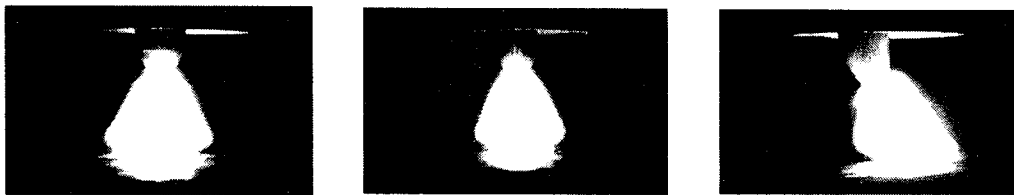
Various electrodes used for TIG melt run welding(2%Th-W, \varnothing 3.2mm)
